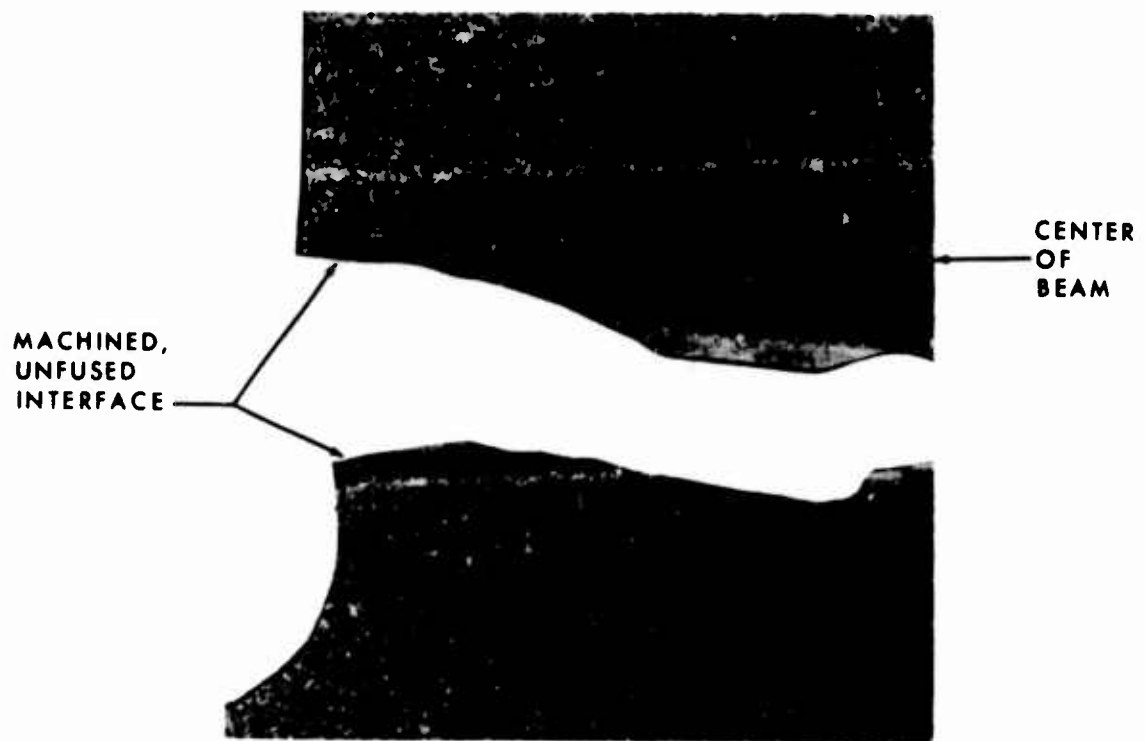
Electron Beam Weld - Gear/Flange, Second-Row Pinion.
